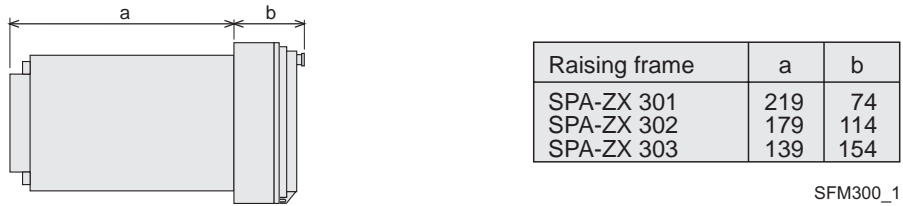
Semi-flush mounting relay case (dimensions in mm)
